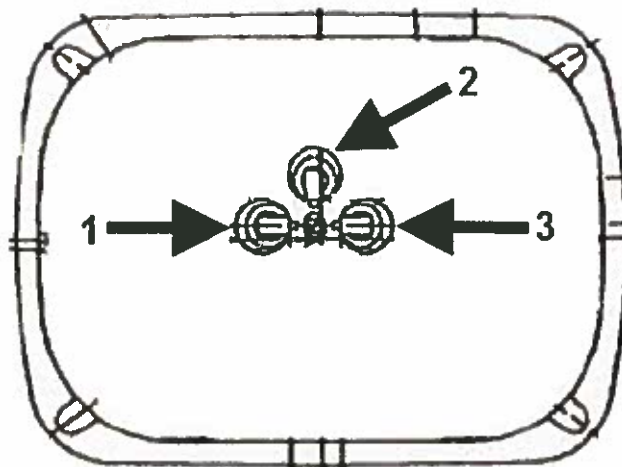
Rectangular Sealed-Beam Headlight (H5054)
